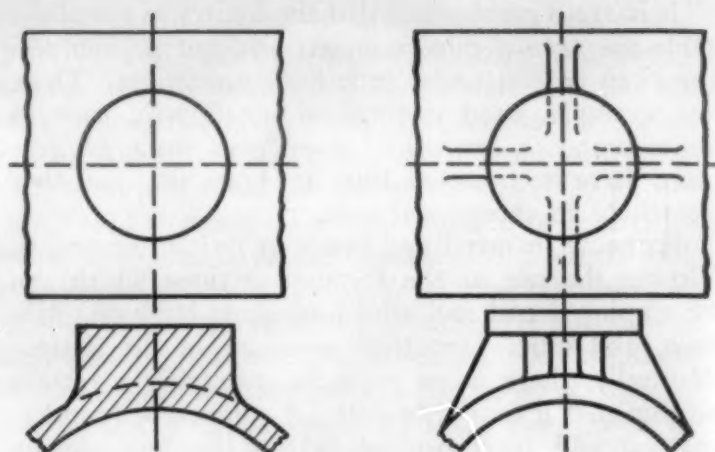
Designs for bolting or bearing bosses. That at left is poor because of the thickened section at the boss. That at right is good, even though it involves the use of cores, because it promotes section uniformity.
